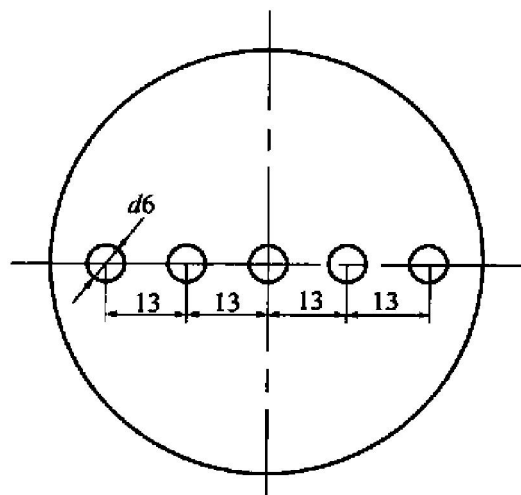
Die layout of extrusion test 5 (Unit: mm)
